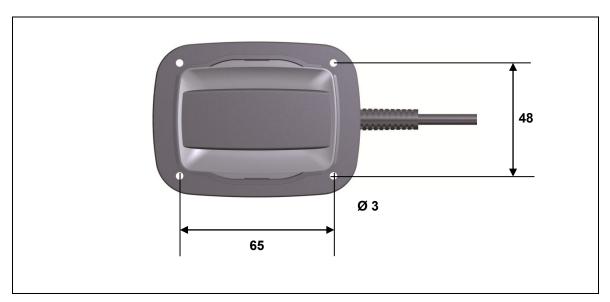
Installation dimensions for the CHAIRCONTROL handset (in mm)
